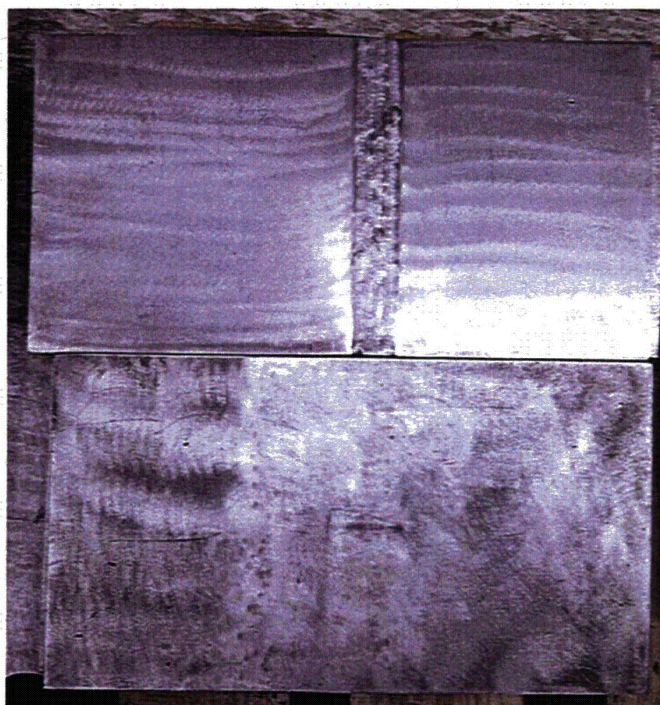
Reactor Internals Samples Used in Testing. Top shows weld crown present; bottom shows weld crown removed.
